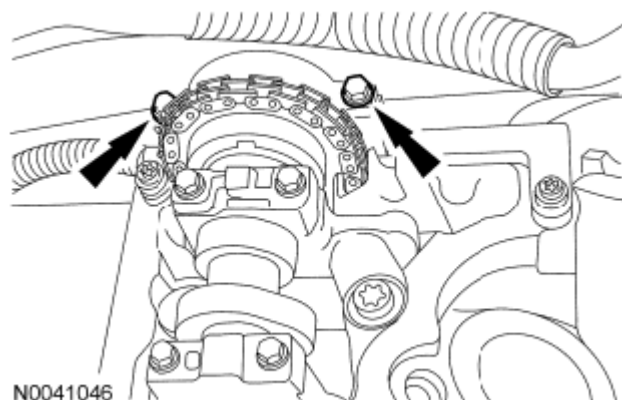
Locating Camshaft Sprocket Holding Tool Clamp Bolts
